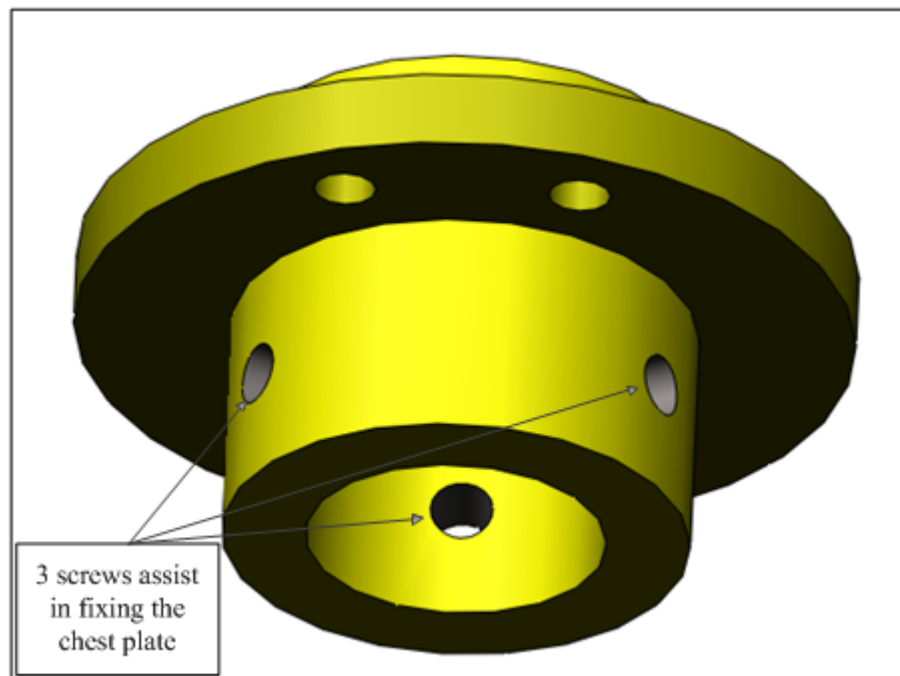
A circular pattern of screws on the flange to assist in fixing.
